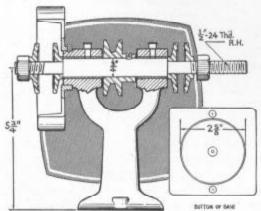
Assembly Drawing of Bench Grinder and Polishing Head.
